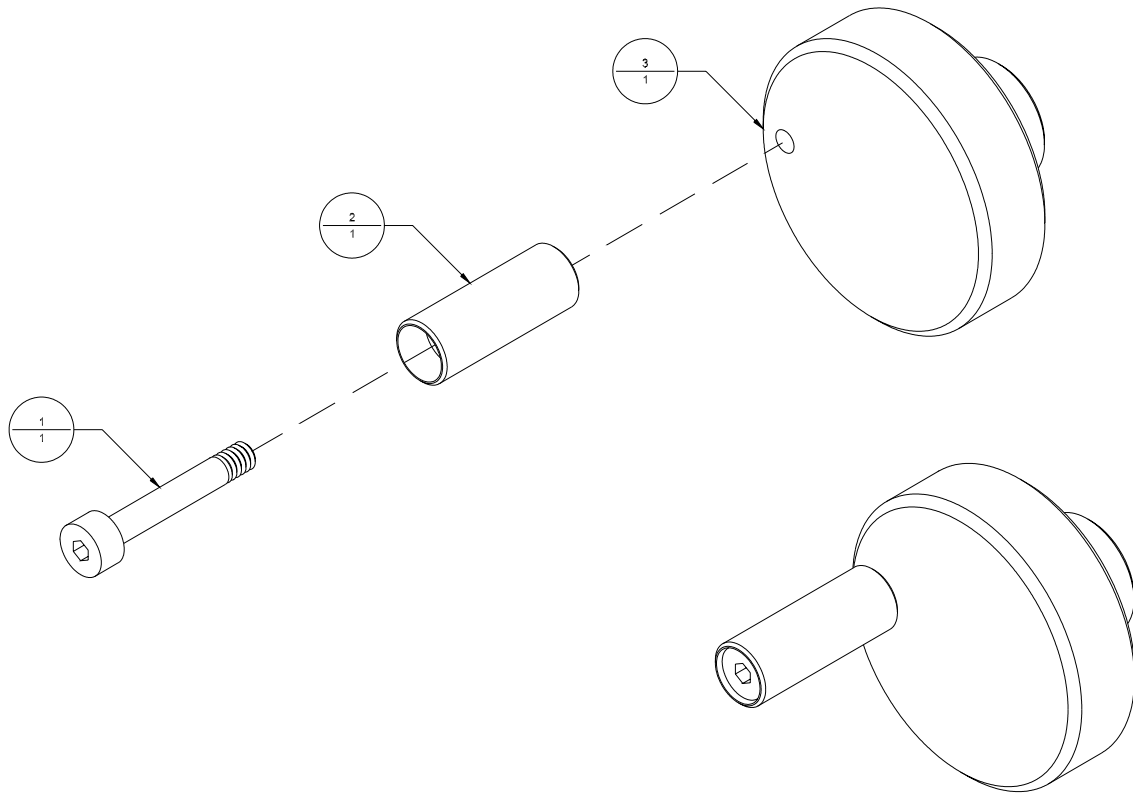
Bridge Handwheel Assembly (438311A)
